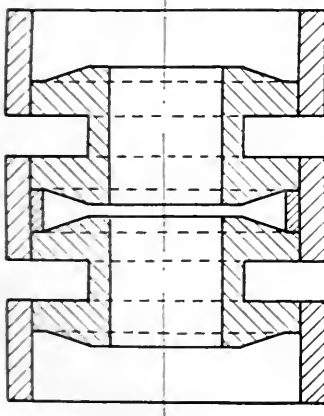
SPRING ELEMENTS IN THE FUEL-INJECTION VALVE OF THE HESSELMAN SOLID-INJECTION OIL ENGINE
